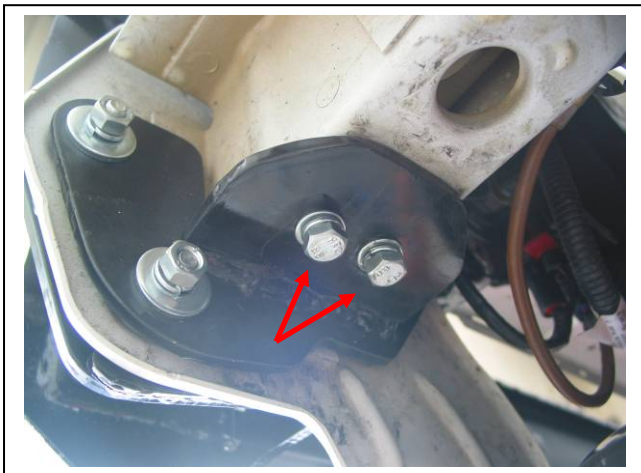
Chassis support attached to front of chassis. Passengers side shown.
